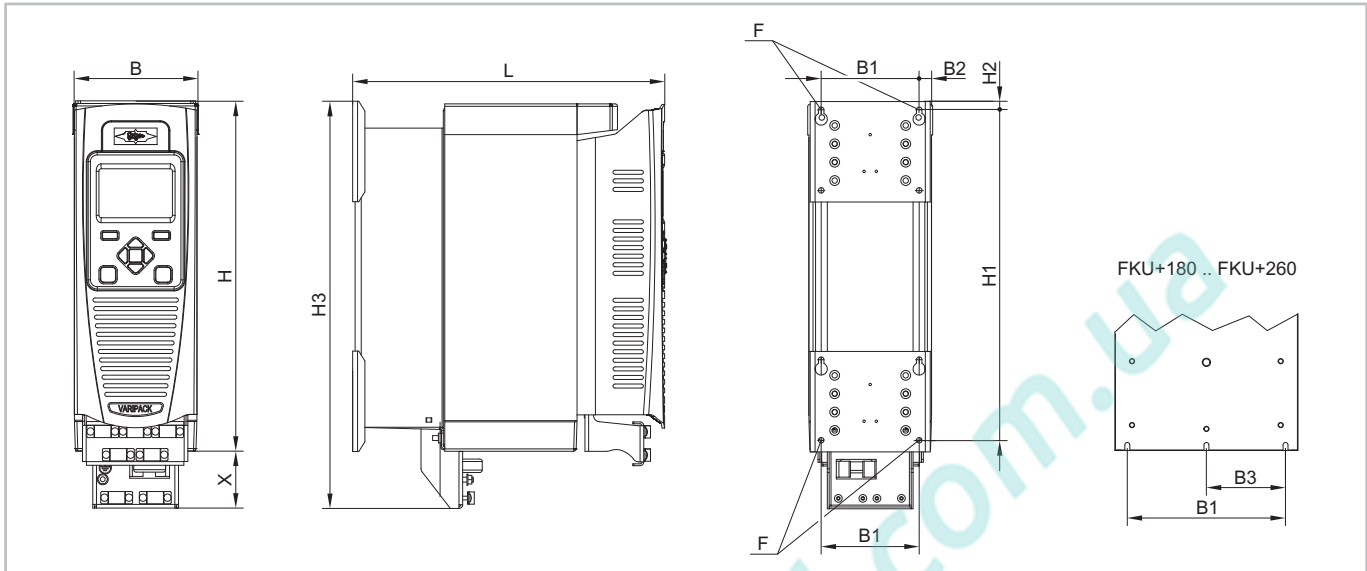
Dimensional drawings FDU+6 .. FKU+260 for switch cabinet mounting (drawing shows FDU with optional control panel)
